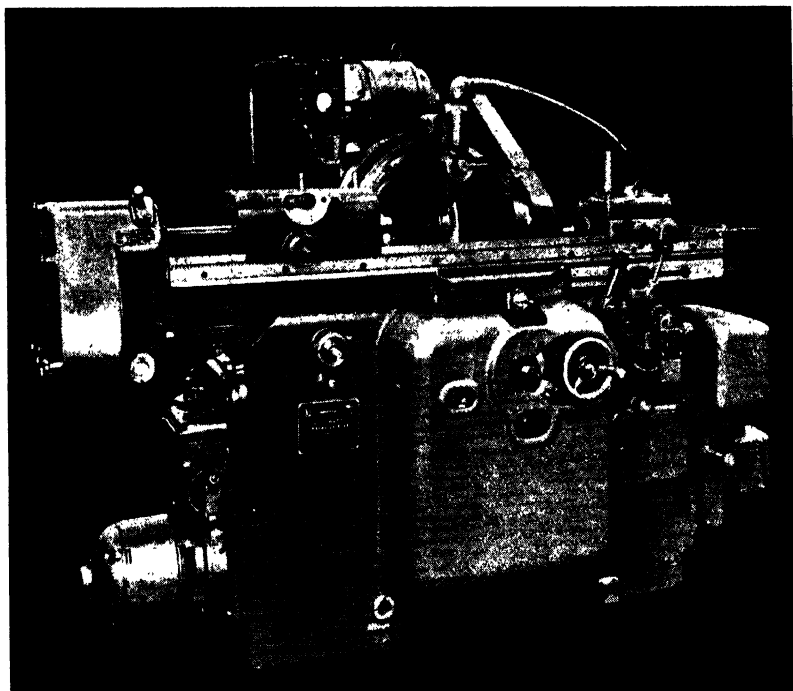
A TYPICAL JONES AND LAMSON THREAD-GRINDING MACHINE
